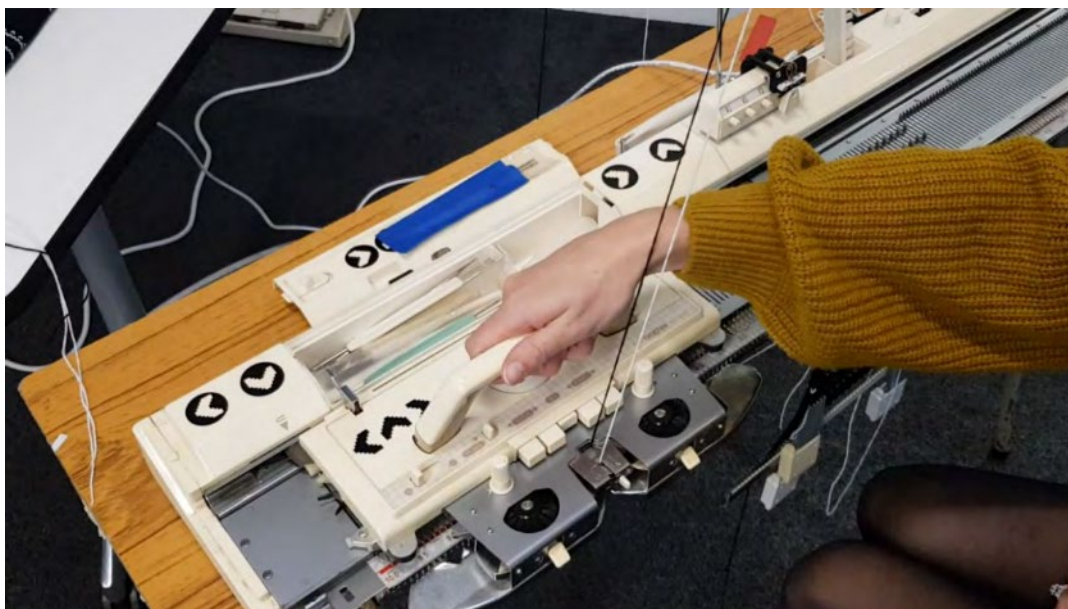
Participant holding the handle of the knit carriage to control the knitting machine
